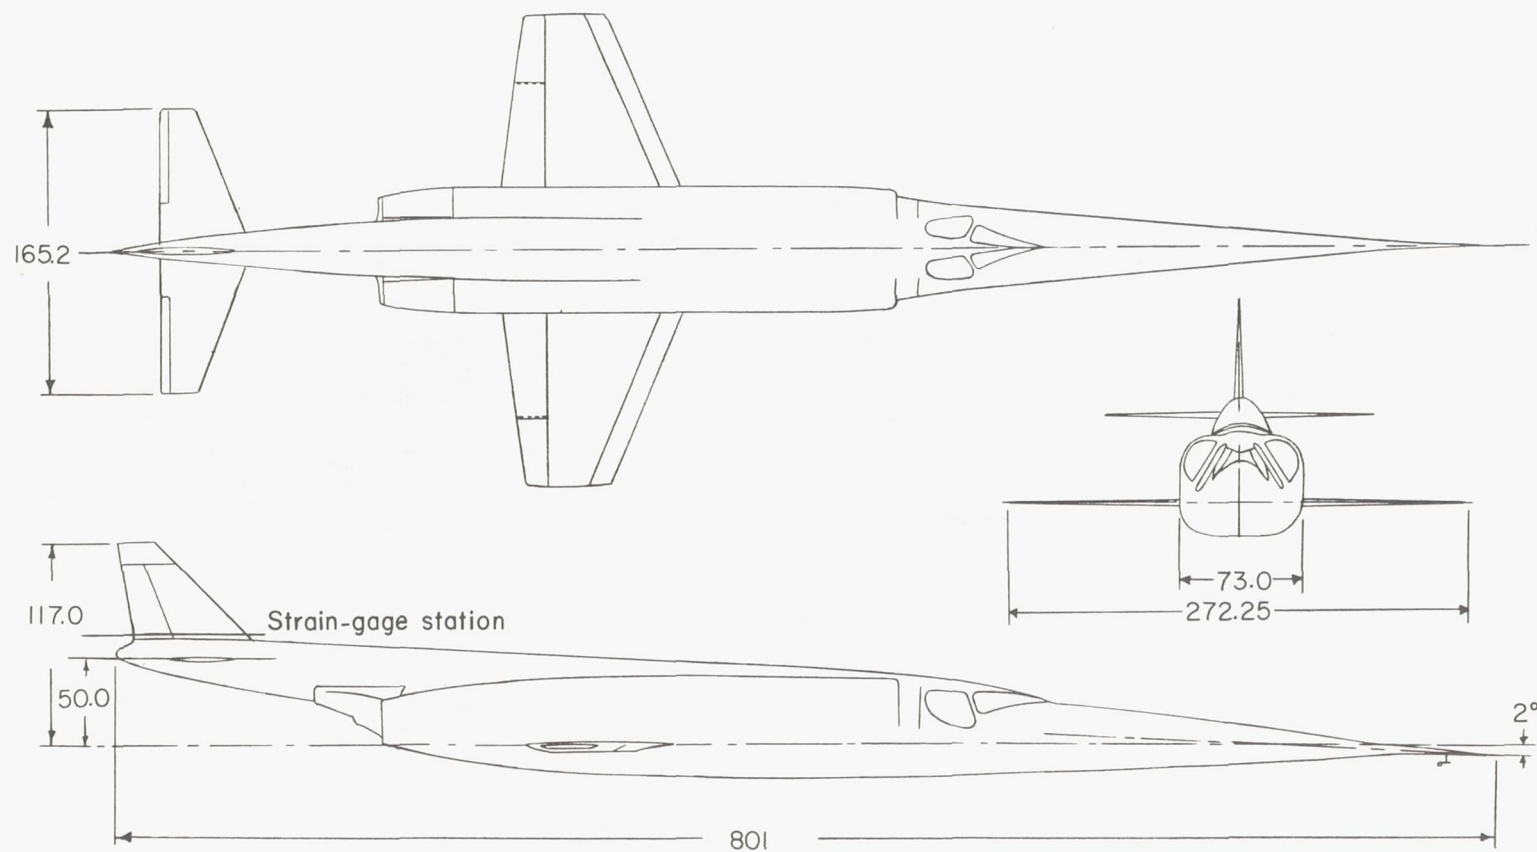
Three-view drawing of the X-3 airplane. All dimensions in inches.
